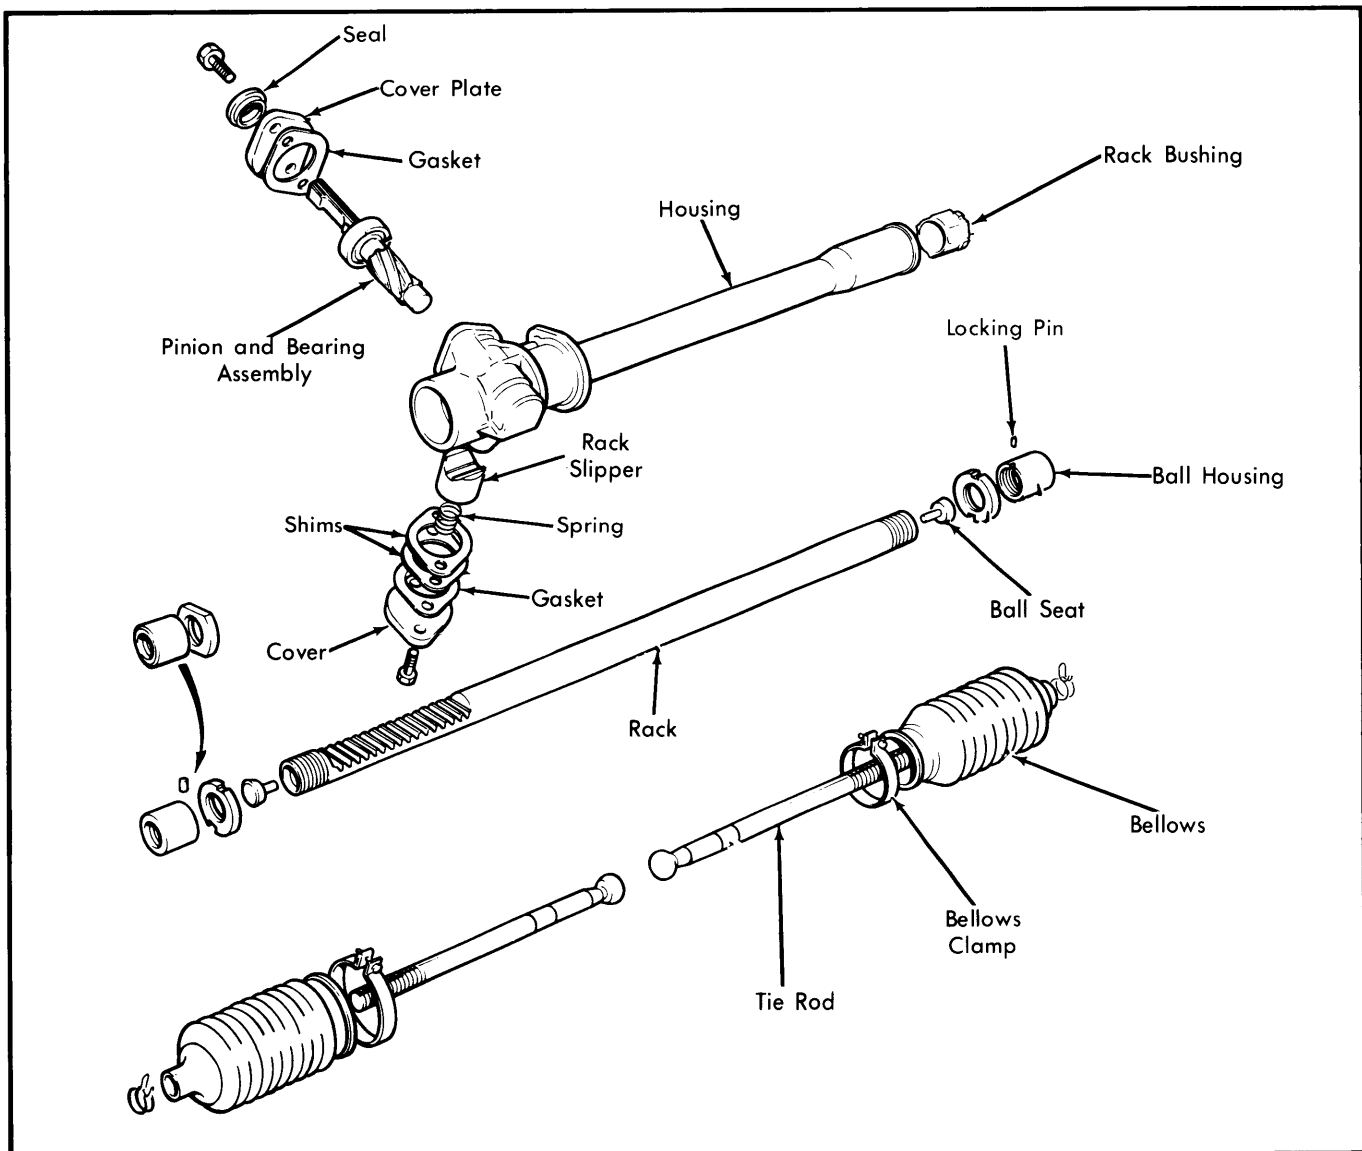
Exploded View of Fiesta Rack & Pinion Steering Gear
